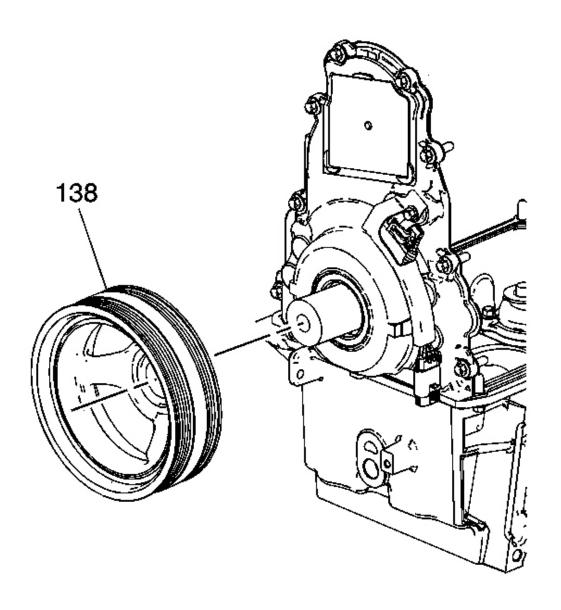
Crankshaft Balancer Pulley Courtesy of GENERAL MOTORS CORP.
